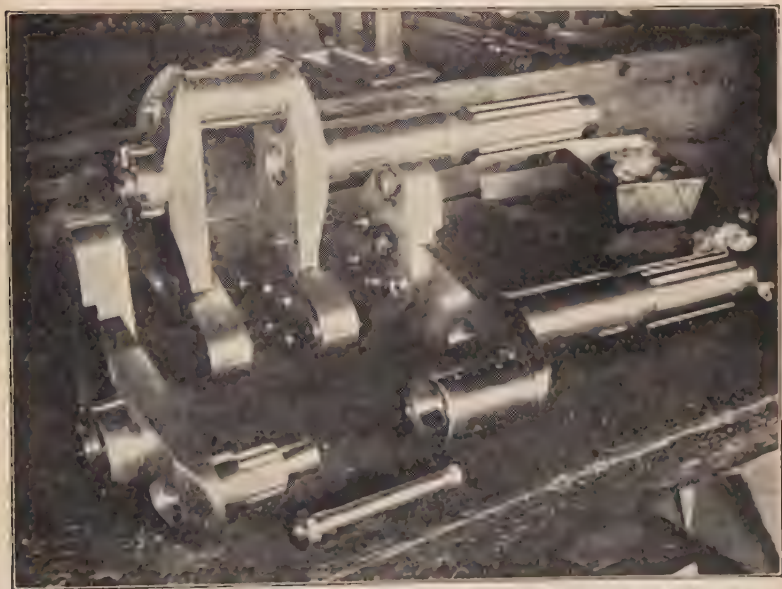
Crankshaft of Wasp engine. The one in front shows how it is made in two parts that fit together with splines and are held by a through bolt.
